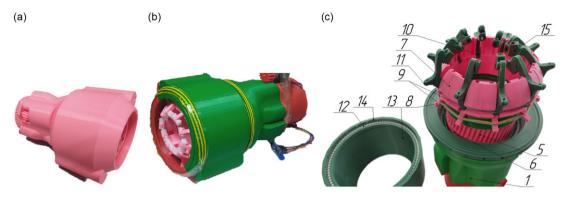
Prototypes of the gripper device; (a) -1: 2 layout; (b) - An prototype without a clip; (c) - An prototype with a clip (1 - outer tube; 2 - inner tube; 5 - toothed profile, 6 - ball-screw transmission; 7 - gripper housing; 8 - pawl; 9 - springs; 10 - finger with ratchet wheel; 11 - roller; 12 - bearings; 13 - clip; 14 - cone; 15 - soft sponge.).
